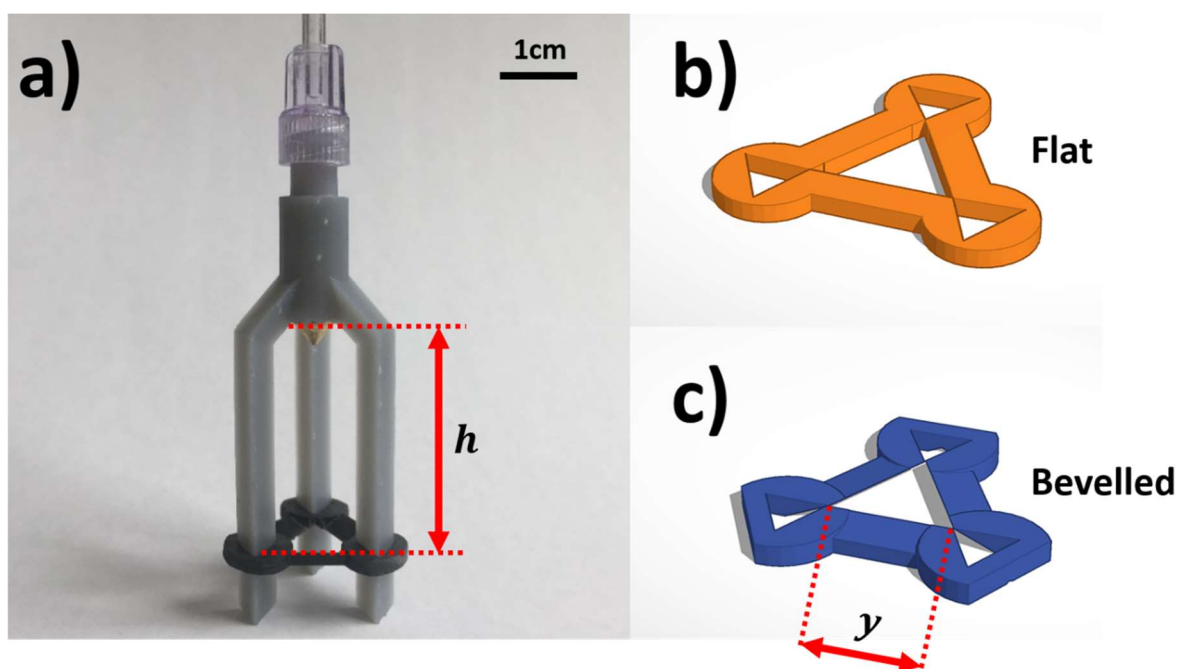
a) 3D printed frame with adjustable base, liquid injection nozzle and Luer connection for controlled flow injection of surfactant solution. b) & c) CAD drawings of frame base showing initial flat and subsequent bevelled designs respectively.
